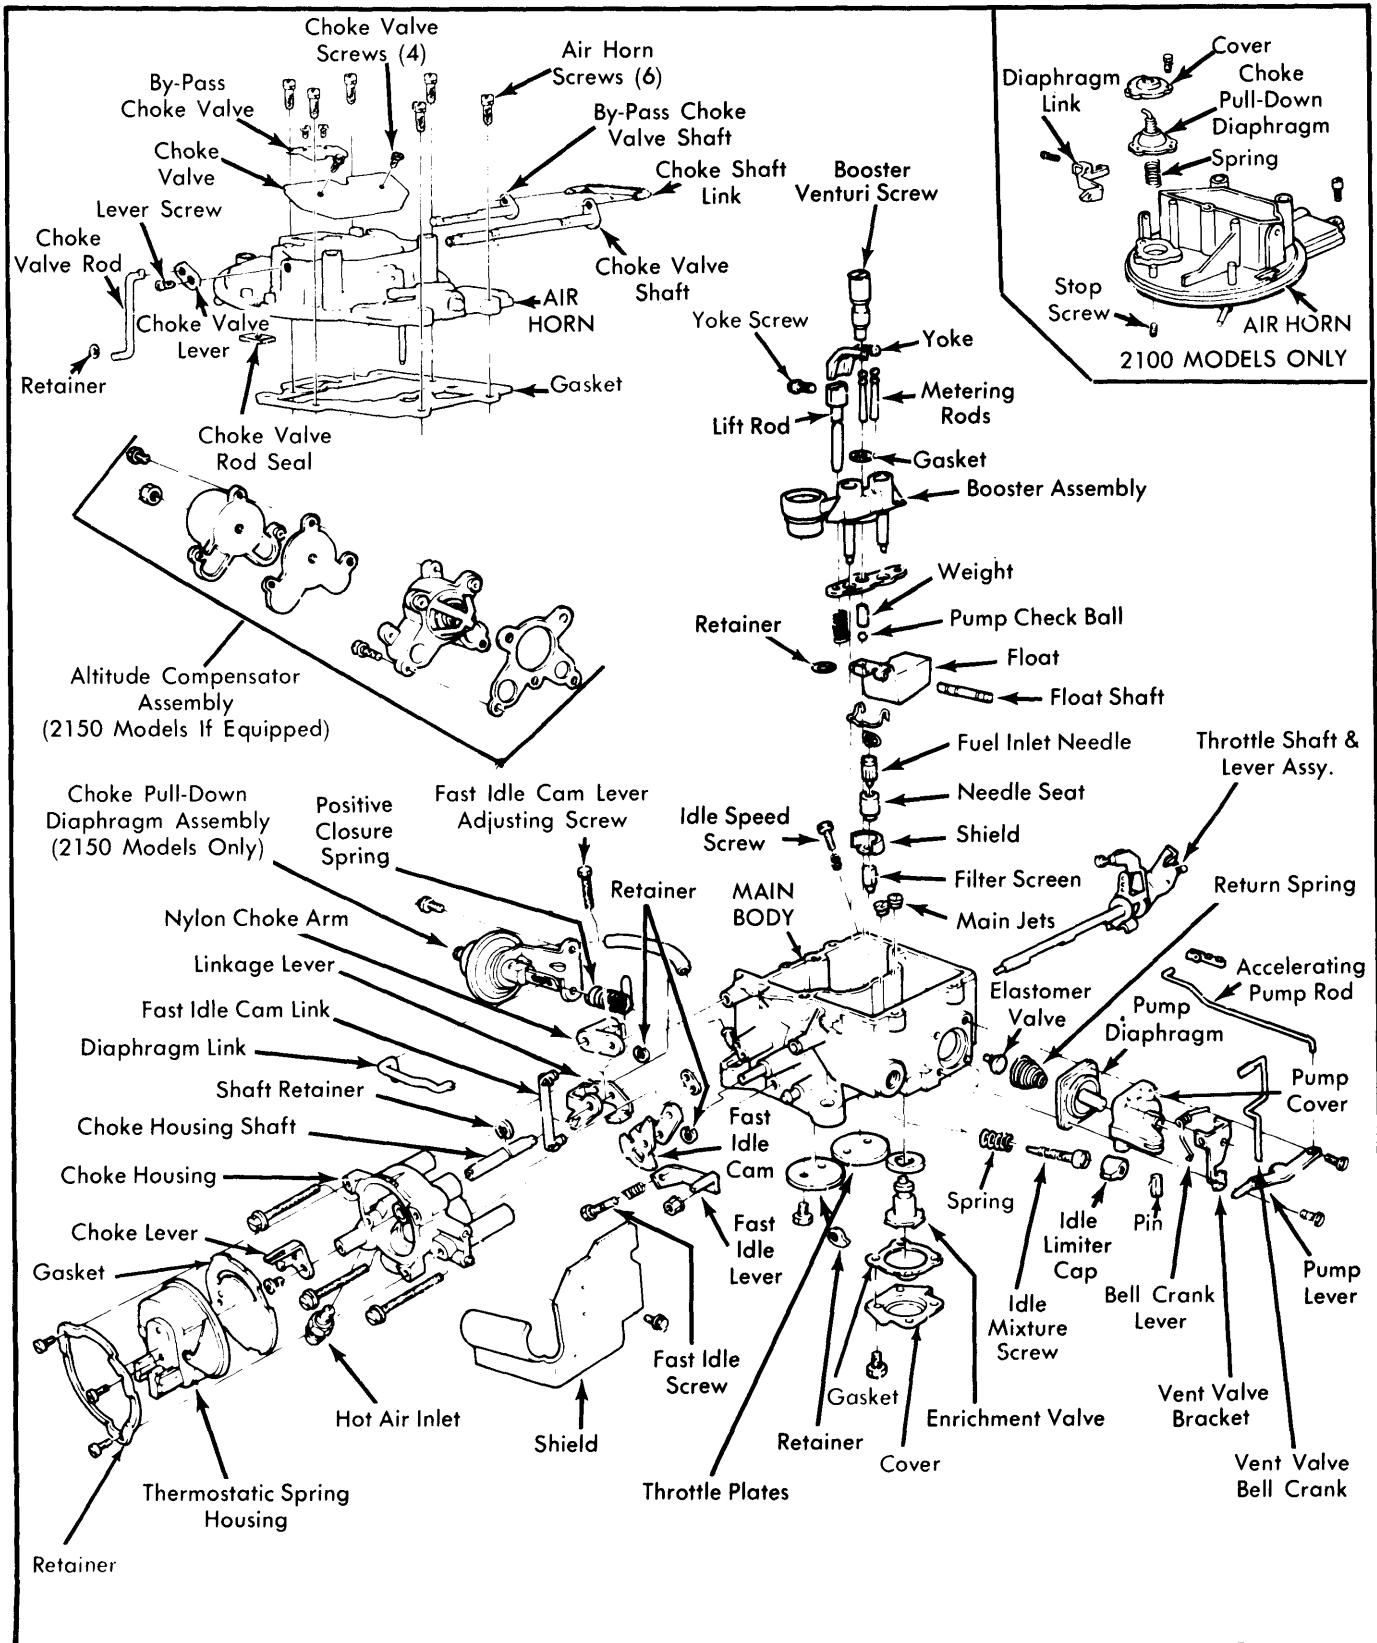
Exploded View of Motorcraft Model 2100 & 2150 Carburetor Assembly
